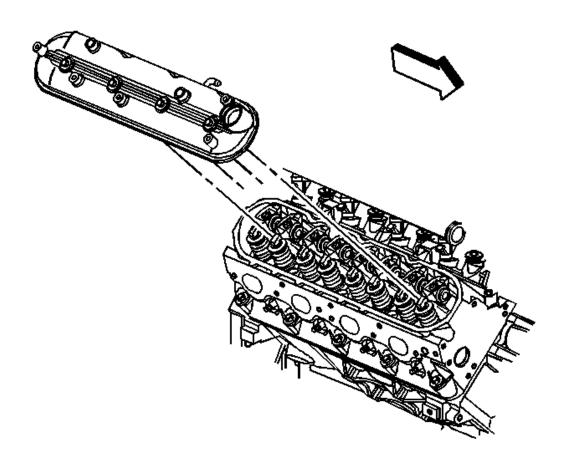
View Of Valve Rocker Arm Cover (Right) Courtesy of GENERAL MOTORS CORP.
